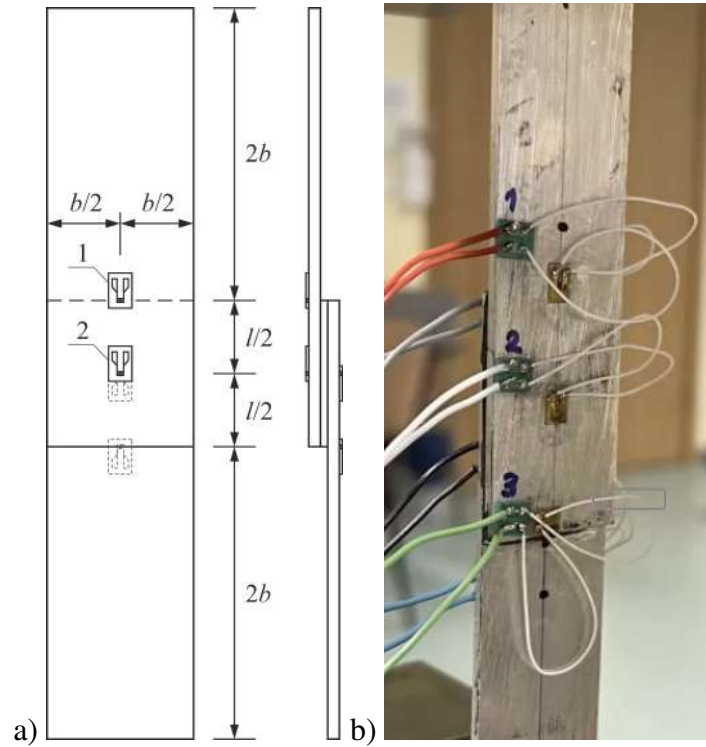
View of the test: a) diagram of the specimen with strain-gauge attachment points, b) specimen positioned in the grips of a universal testing machine
